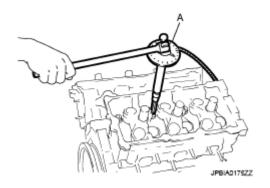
Checking Cylinder Head Bolt Tightening Angle Using Angle Wrench Courtesy of NISSAN MOTOR CO., U.S.A.
